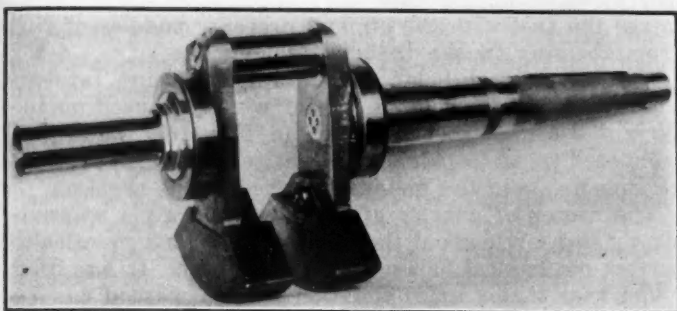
CRANKSHAFT FOR WRIGHT J-4A ENGINE
